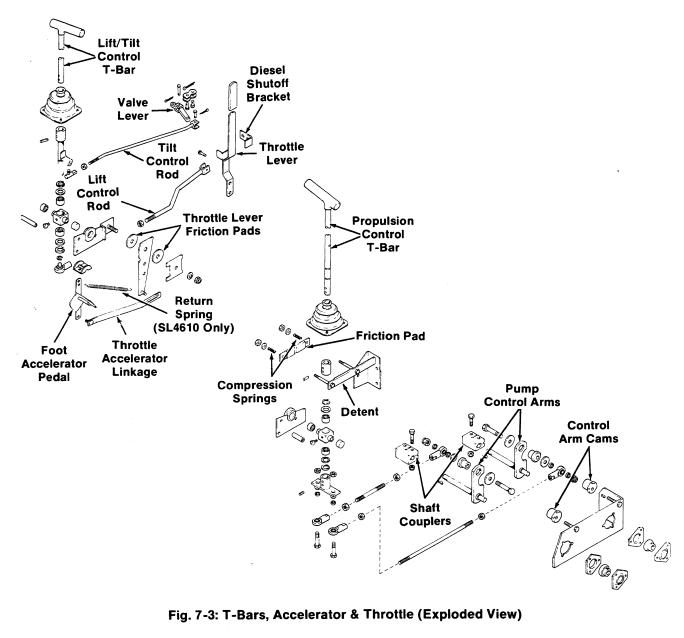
T-Bars, Accelerator & Throttle (Exploded View)
